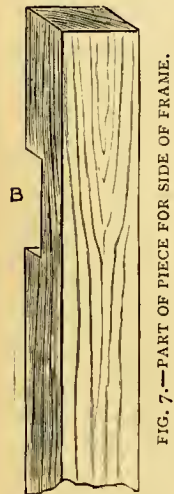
PART OF PIECE FOR SIDE OF FRAME.
